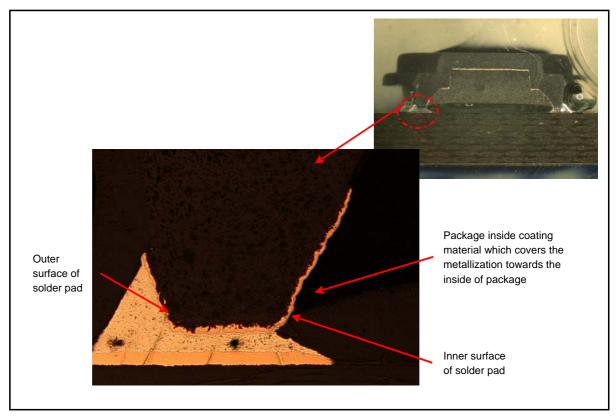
Wetting of solder is different on the inner and outer surface of the solder pad.
